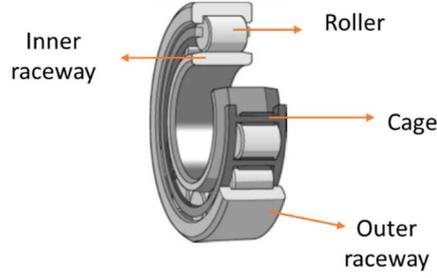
Components of cylindrical roller bearing (adapted from Harris, 2007).
